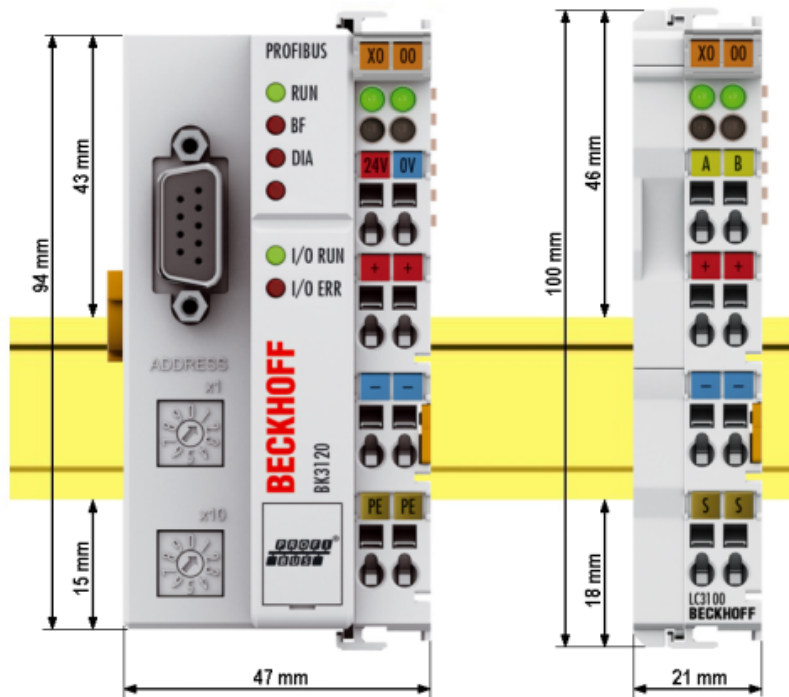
Dimensions, using BK3120 and LC3100 as examples
